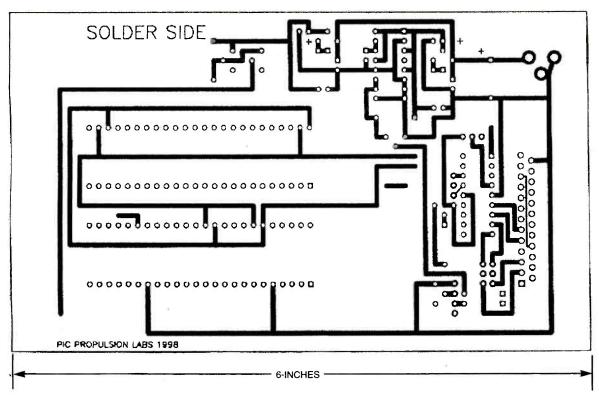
Here's the foil pattern for the solder side of the PIC Replicator PC board.
